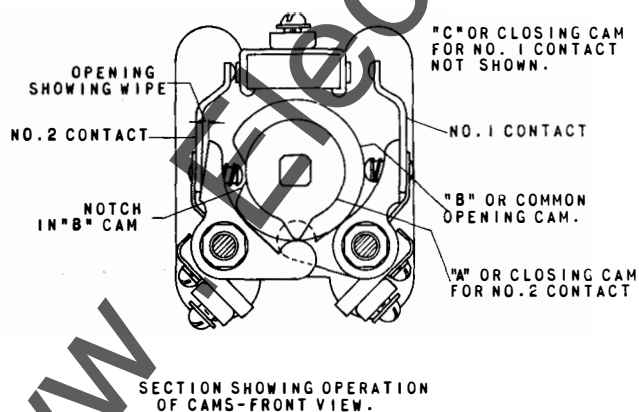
(6507646) Typical Section Showing Operation of Cams - Front View
